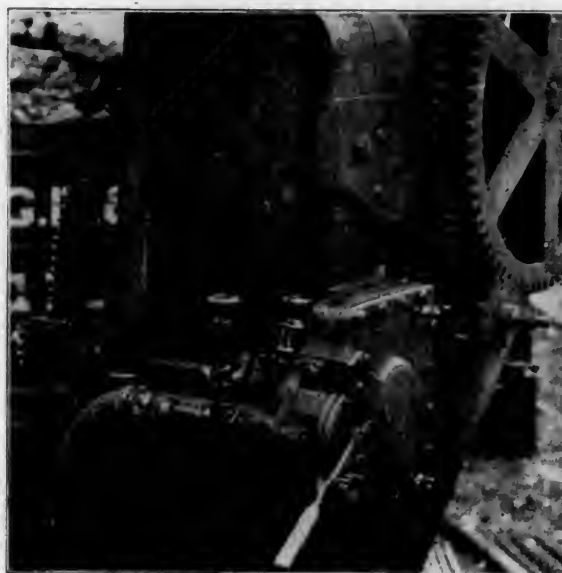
VIEW SHOWING APPLICATION OF THE DAKE AIR MOTOR TO A HAND CRANE.
